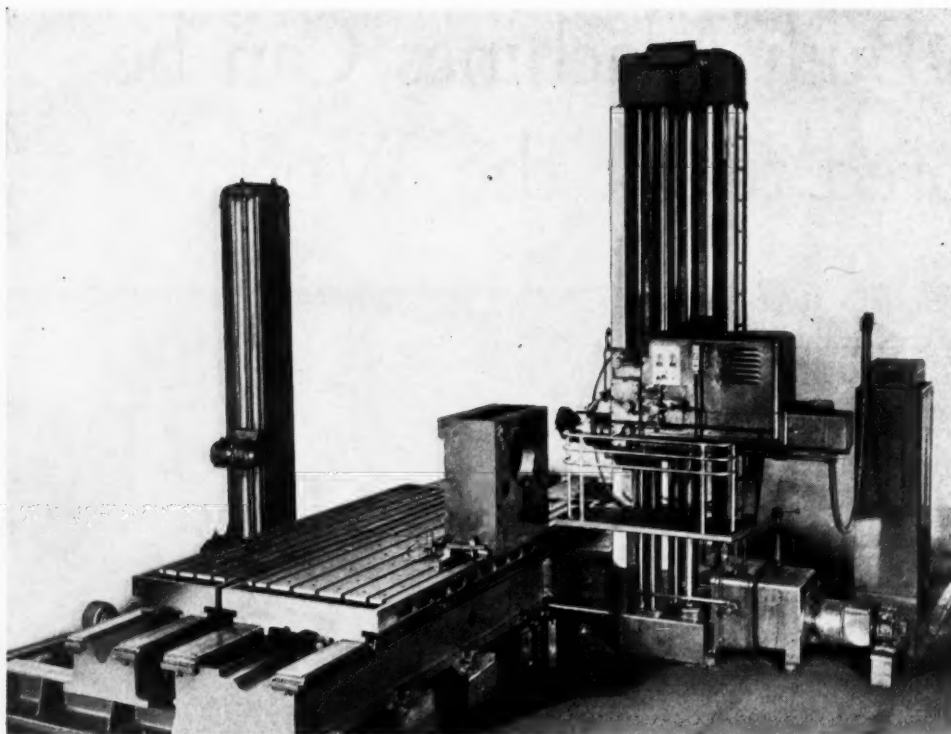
Ingersoll Machine Provided with an Extra Table that May be Used in Handling Wide Work
